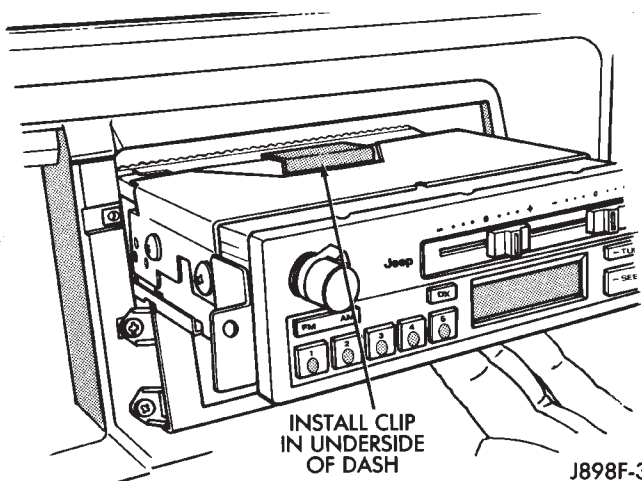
Radio Mounting Screws Remove/Install - XJ
